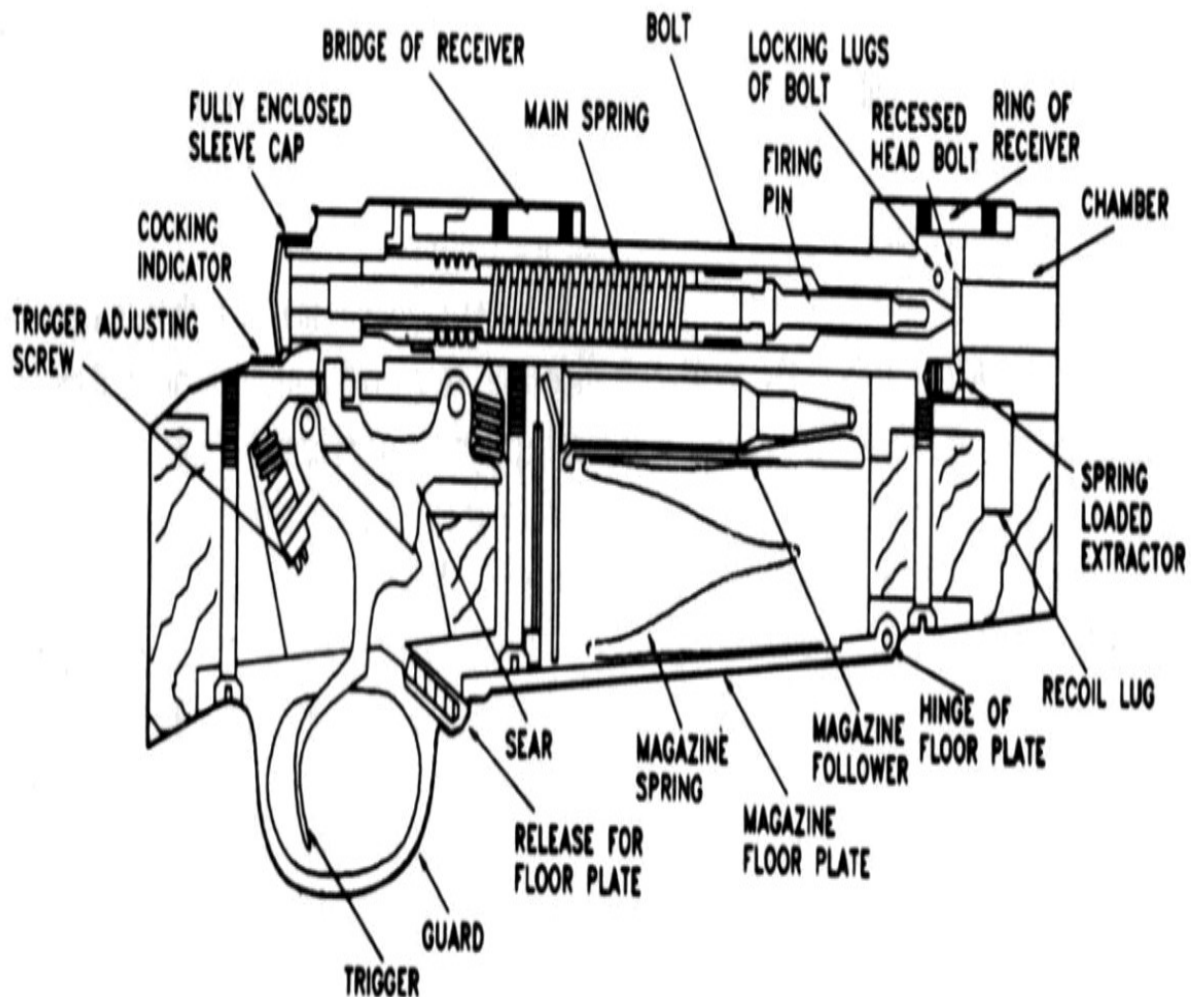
A cross-sectional view of a Winchester Model 70 bolt-action rifle.
